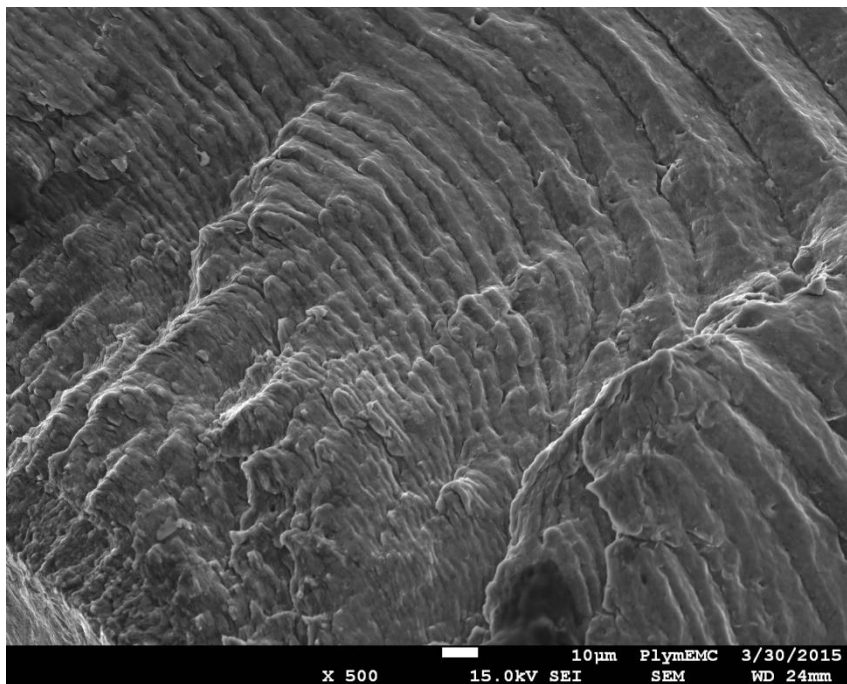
A smaller secondary site of fatigue crack initiation is present at the inner edge of tube specimen IPh2 in the lower left corner of this image.
